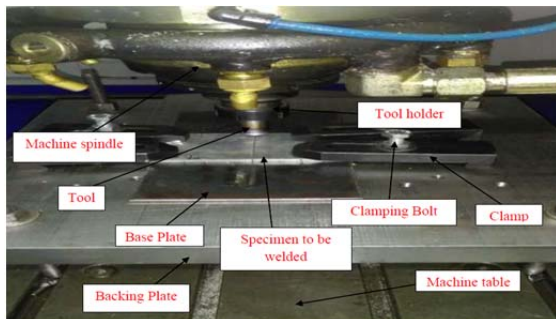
Photograph of modified milling machine used for friction stir welding
